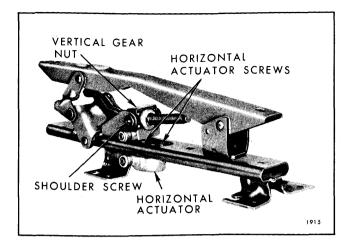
Four-Way Seat Adjuster - "A" Styles
